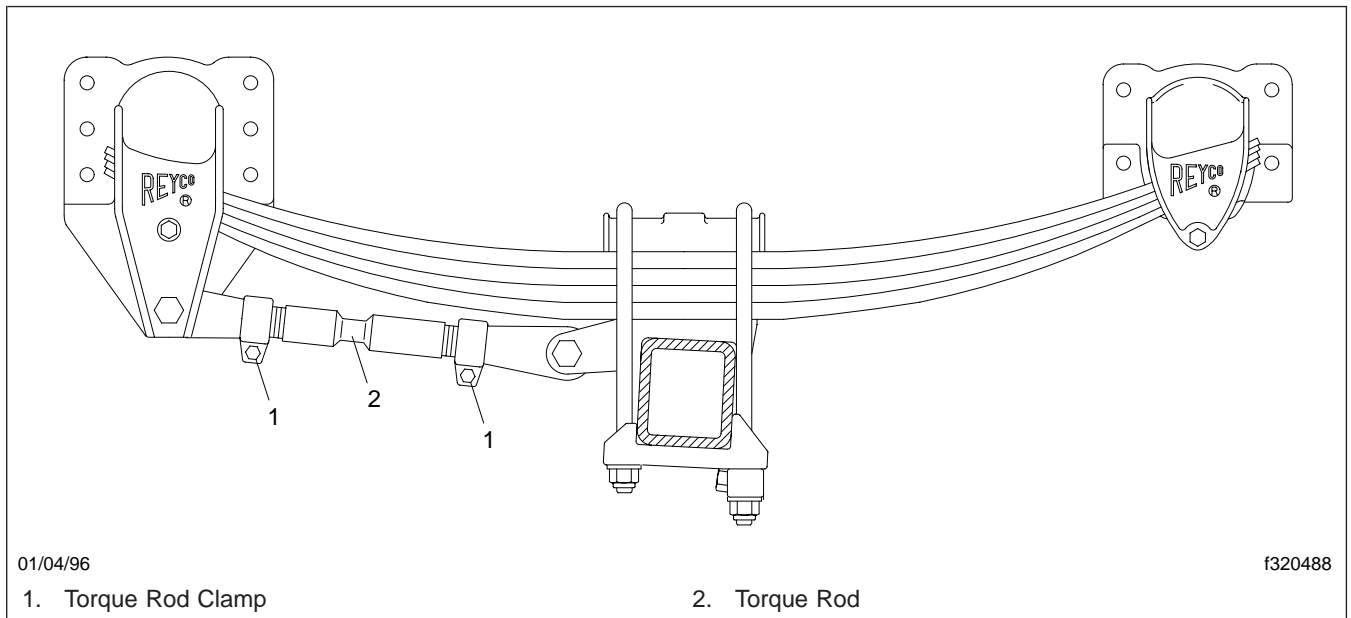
, Reyco 79KB Torque Rod Clamp Position
